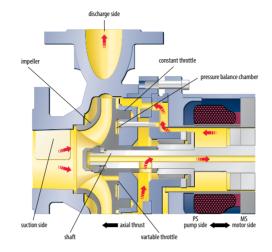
The interaction of a fixed throttling device (labyrinth gap) on the outer diameter of the impeller and a variable throttle in the region of the impeller hub creates axial thrust balancing in the hydraulic balancing device of series CN/CNF/CNK.
